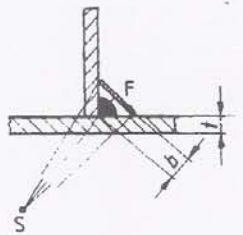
Test arrangement for penetration of fillet welds
